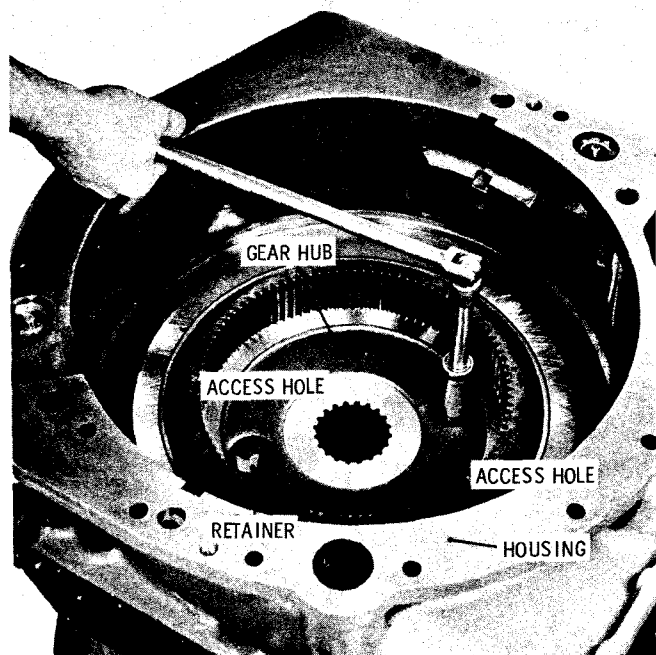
Removing splitter ring gear hub bearing retainer bolts
